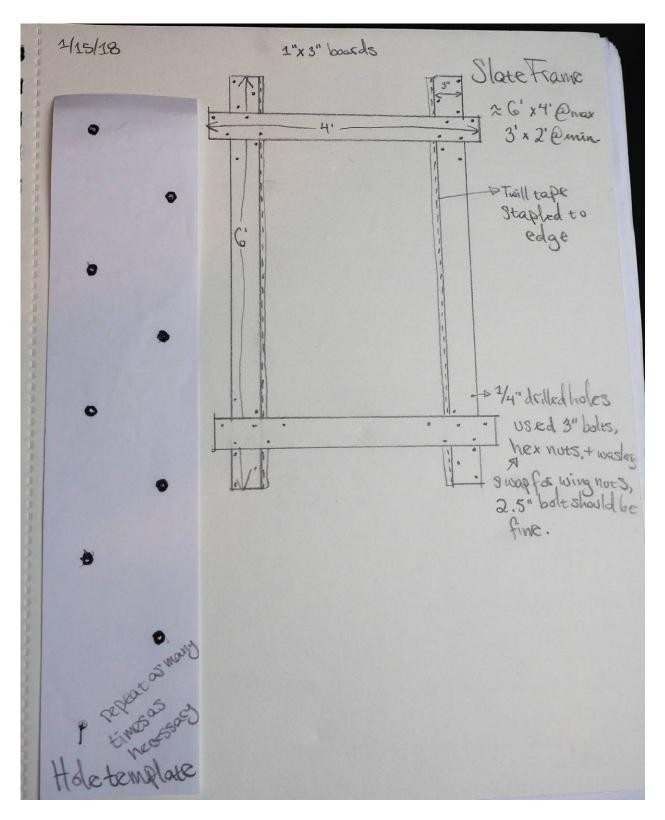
Wooden frame sketch, plans, and hole-placement template.
